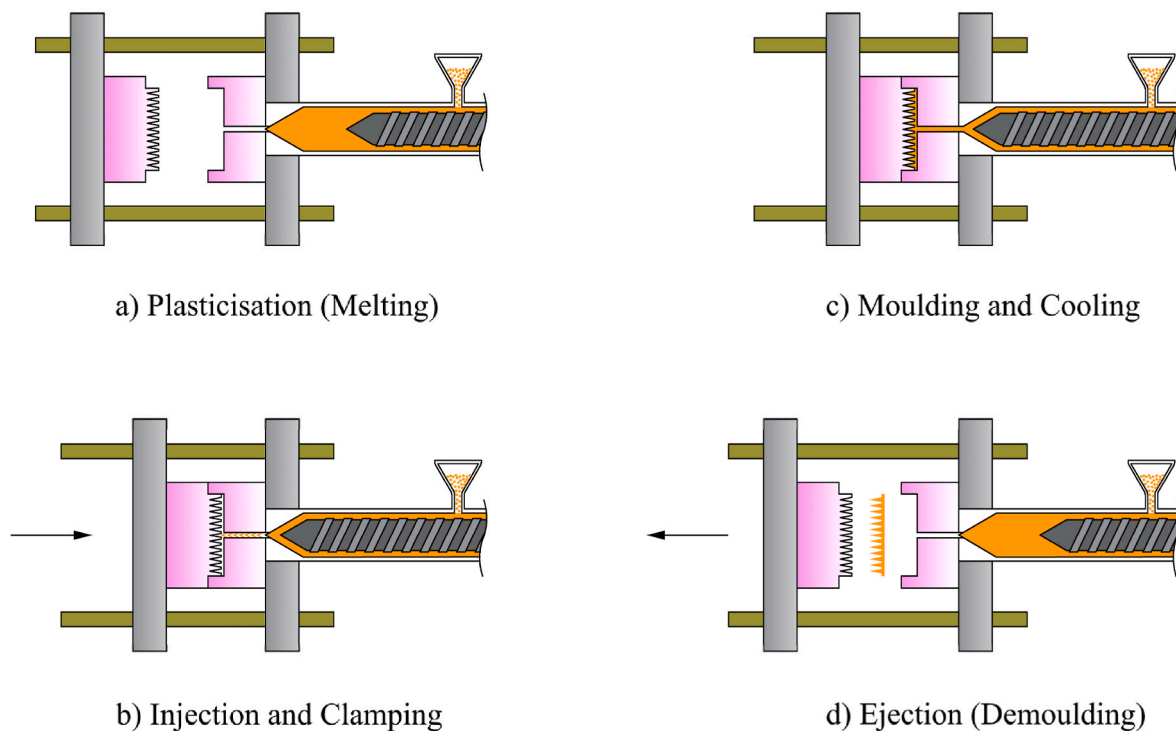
The schematic of the injection moulding process. a) Melting of thermoplastic pellets into the injection unit. b) Injection of pressurised molten material into the mould cavity while applying clamping force. c) Moulding and cooling the molten material for solidification. d) Demoulding the final product.
